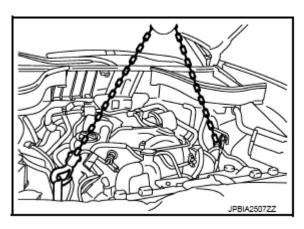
Holding Engine Assembly Using Slinger Courtesy of NISSAN NORTH AMERICA, INC.
